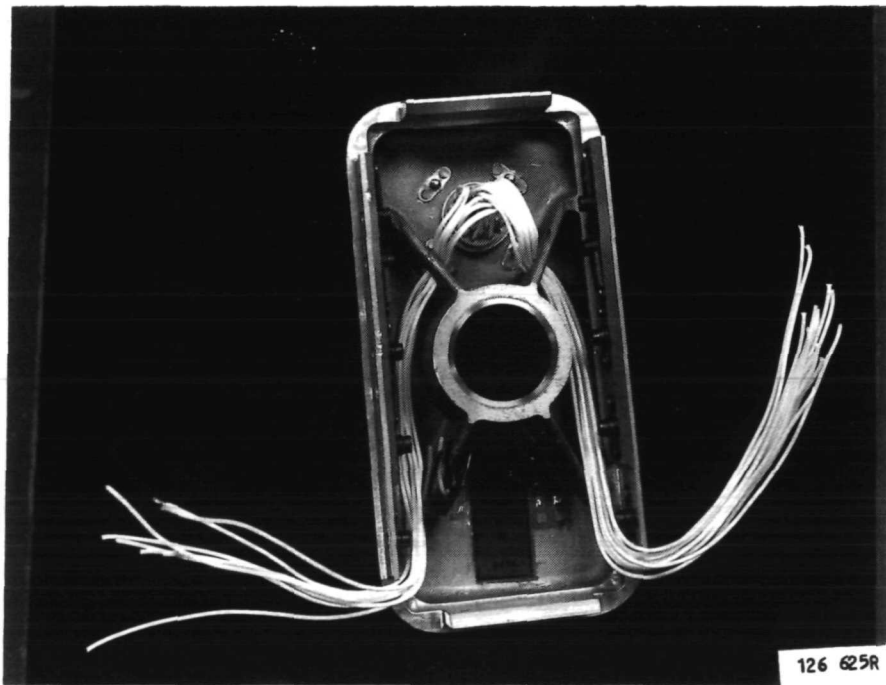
Inboard end bell showing installation of heater, temperature control unit, and wiring.
